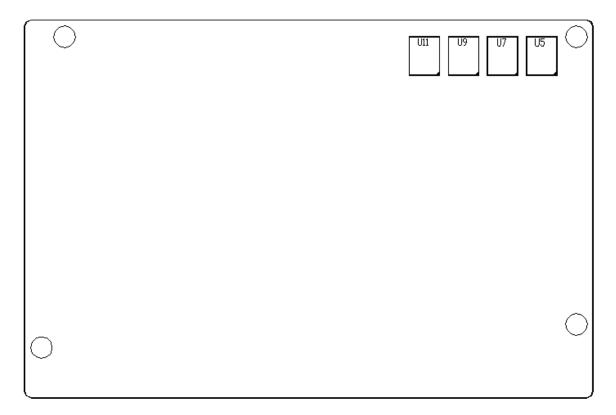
Jumpers and Connectors Location_ Board Bottom
